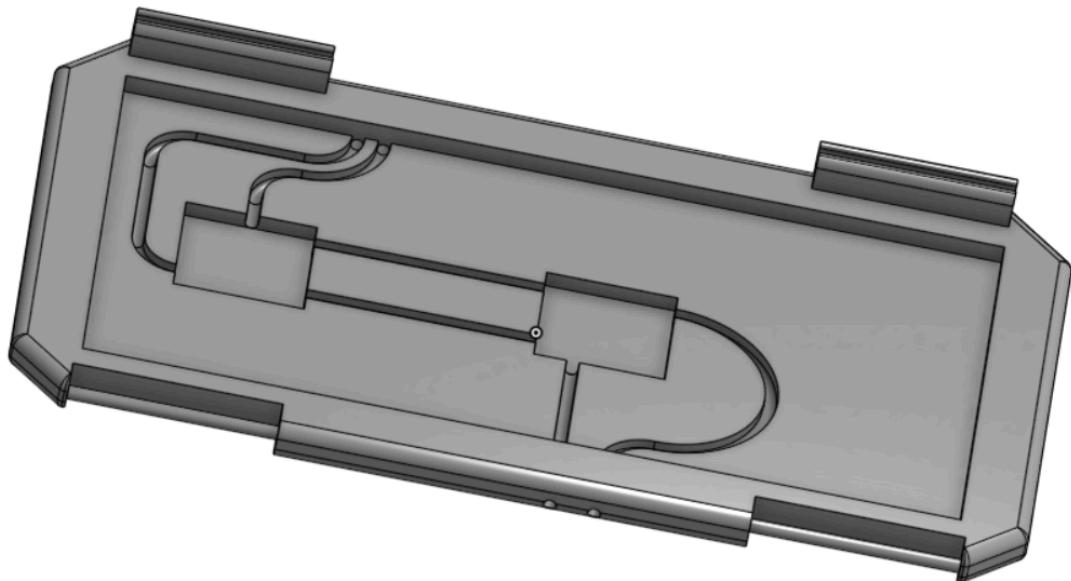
shows the holes cut out for the solar panels and the wiring pathways.
